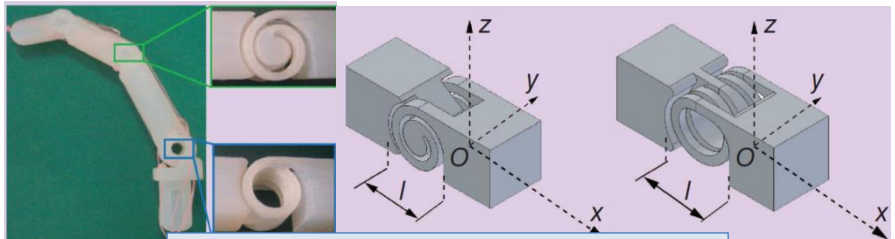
3D printed integrated spring design (courtesy Bologna University)
